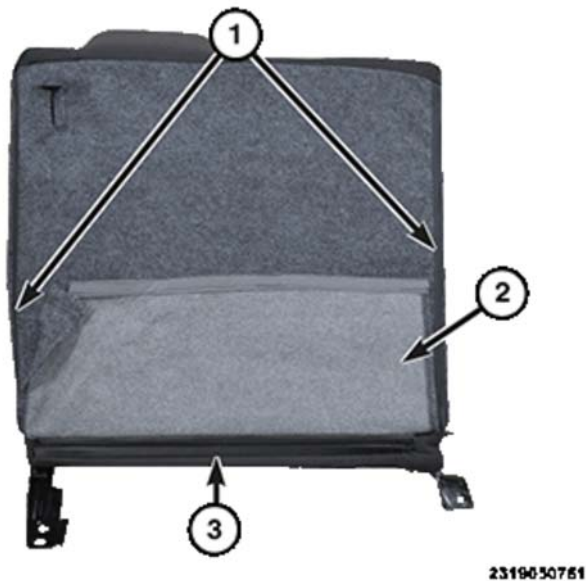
Cover Zippers, Seat Back Cover & Retaining Strip
